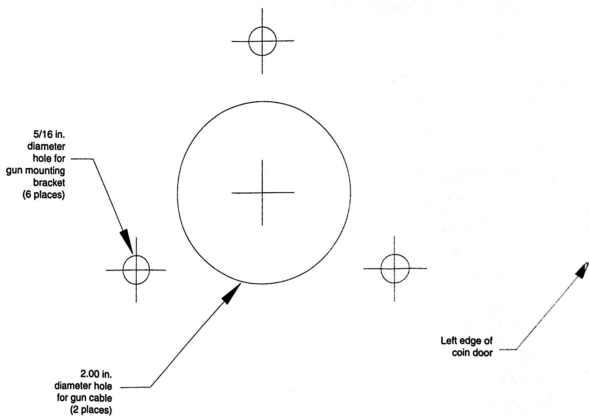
Actual-Size Template for Drilling Front Panel Holes
